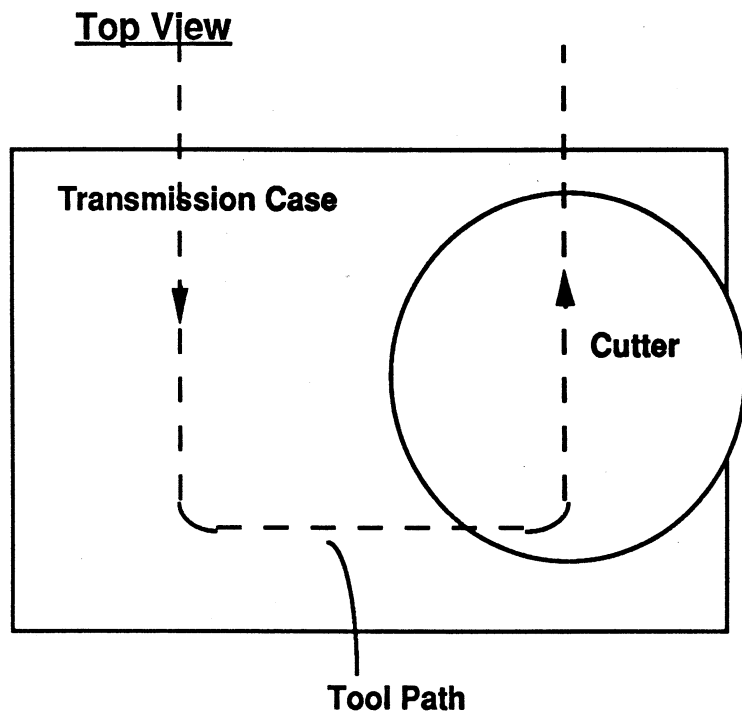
The Effect of Spindle Tilt on The Machining Flatness: The Spindle Tilt Will Cause a Step on the Machined Surface.
